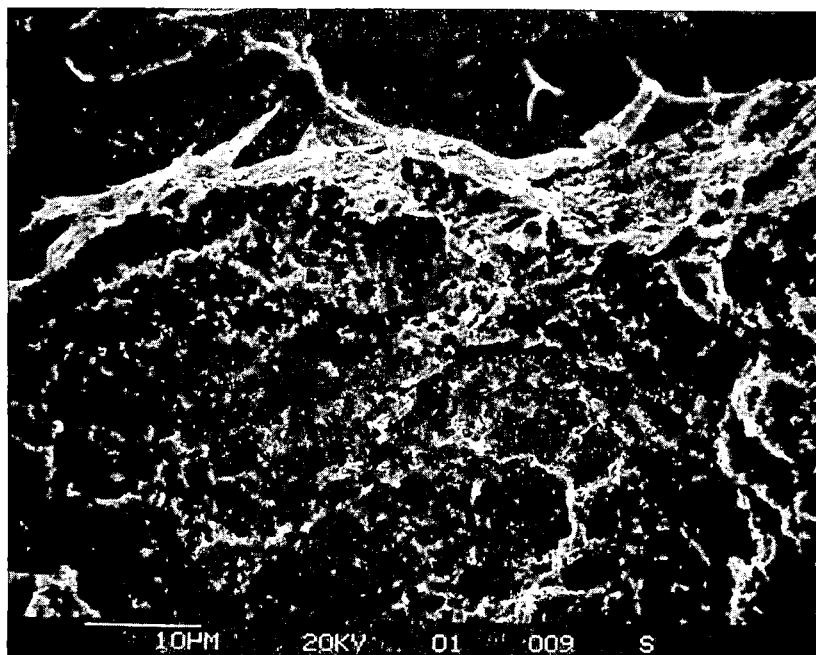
Fractographs Showing the Corroded Nature of the Crack Surface at 108 Degrees for Reducer C
